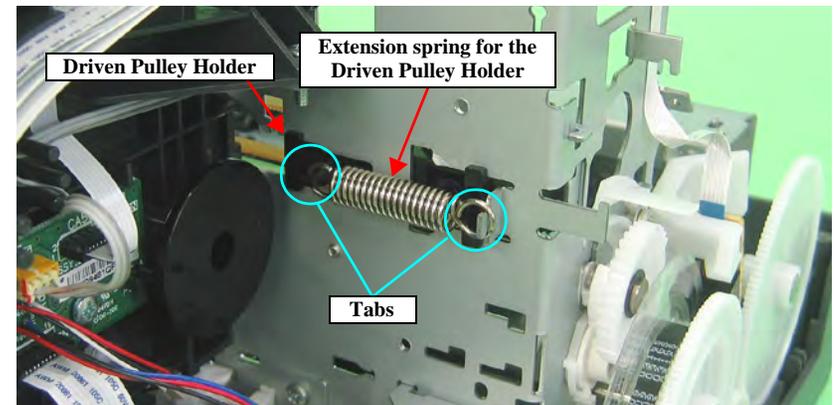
Removing the Extension Spring for the Driven Pulley Holder
